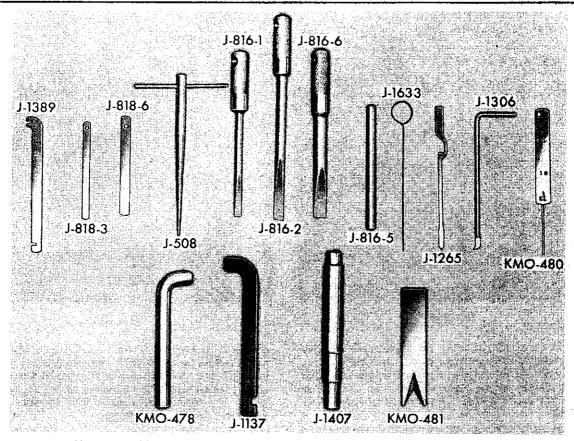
Tools Required to Service Carter WE 532 S Carburetor
